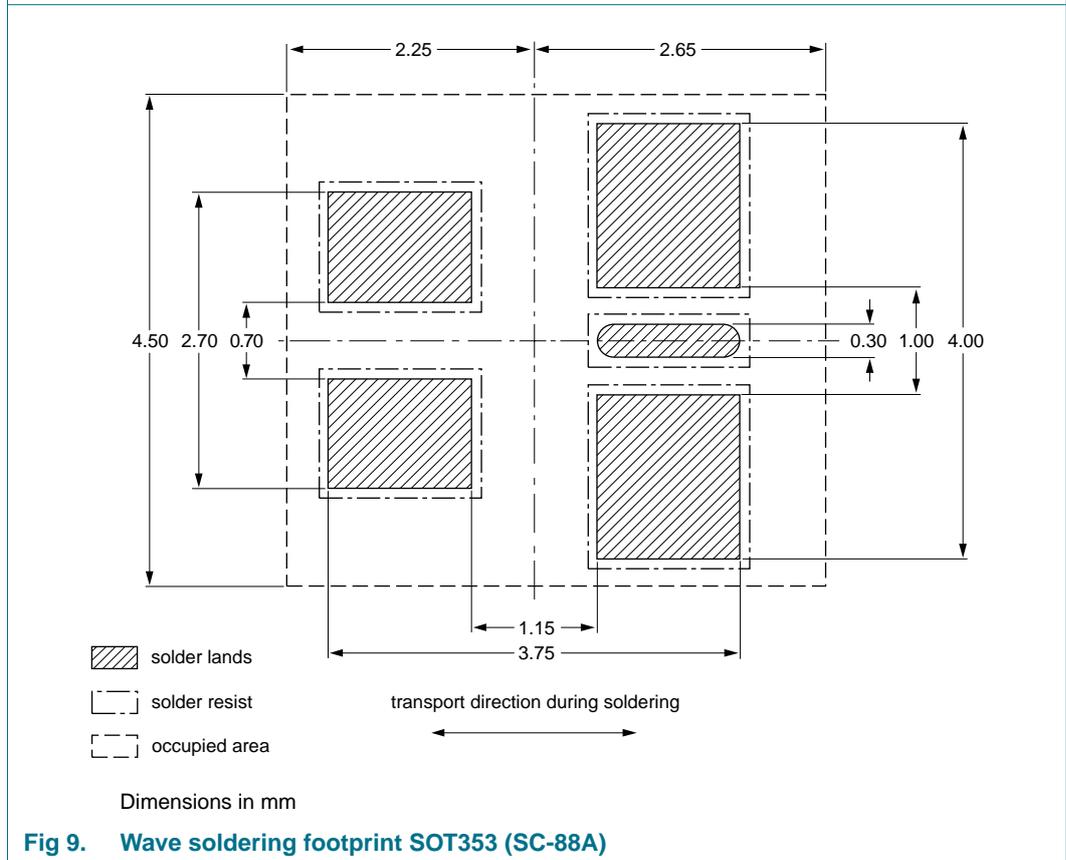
Wave soldering footprint SOT353 (SC-88A)
